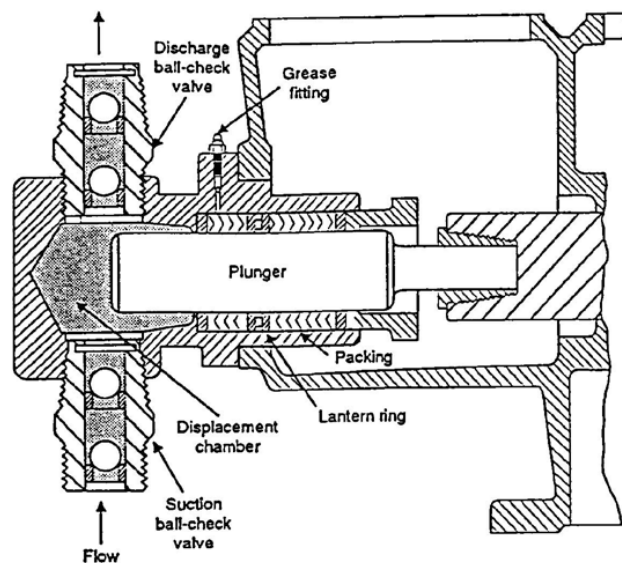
Cross-section drawing of the pump mechanism for a piston type chemical injection pump.⁴
